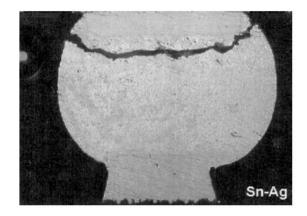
Crack at IMC/solder interface with ENIG surface finish.
